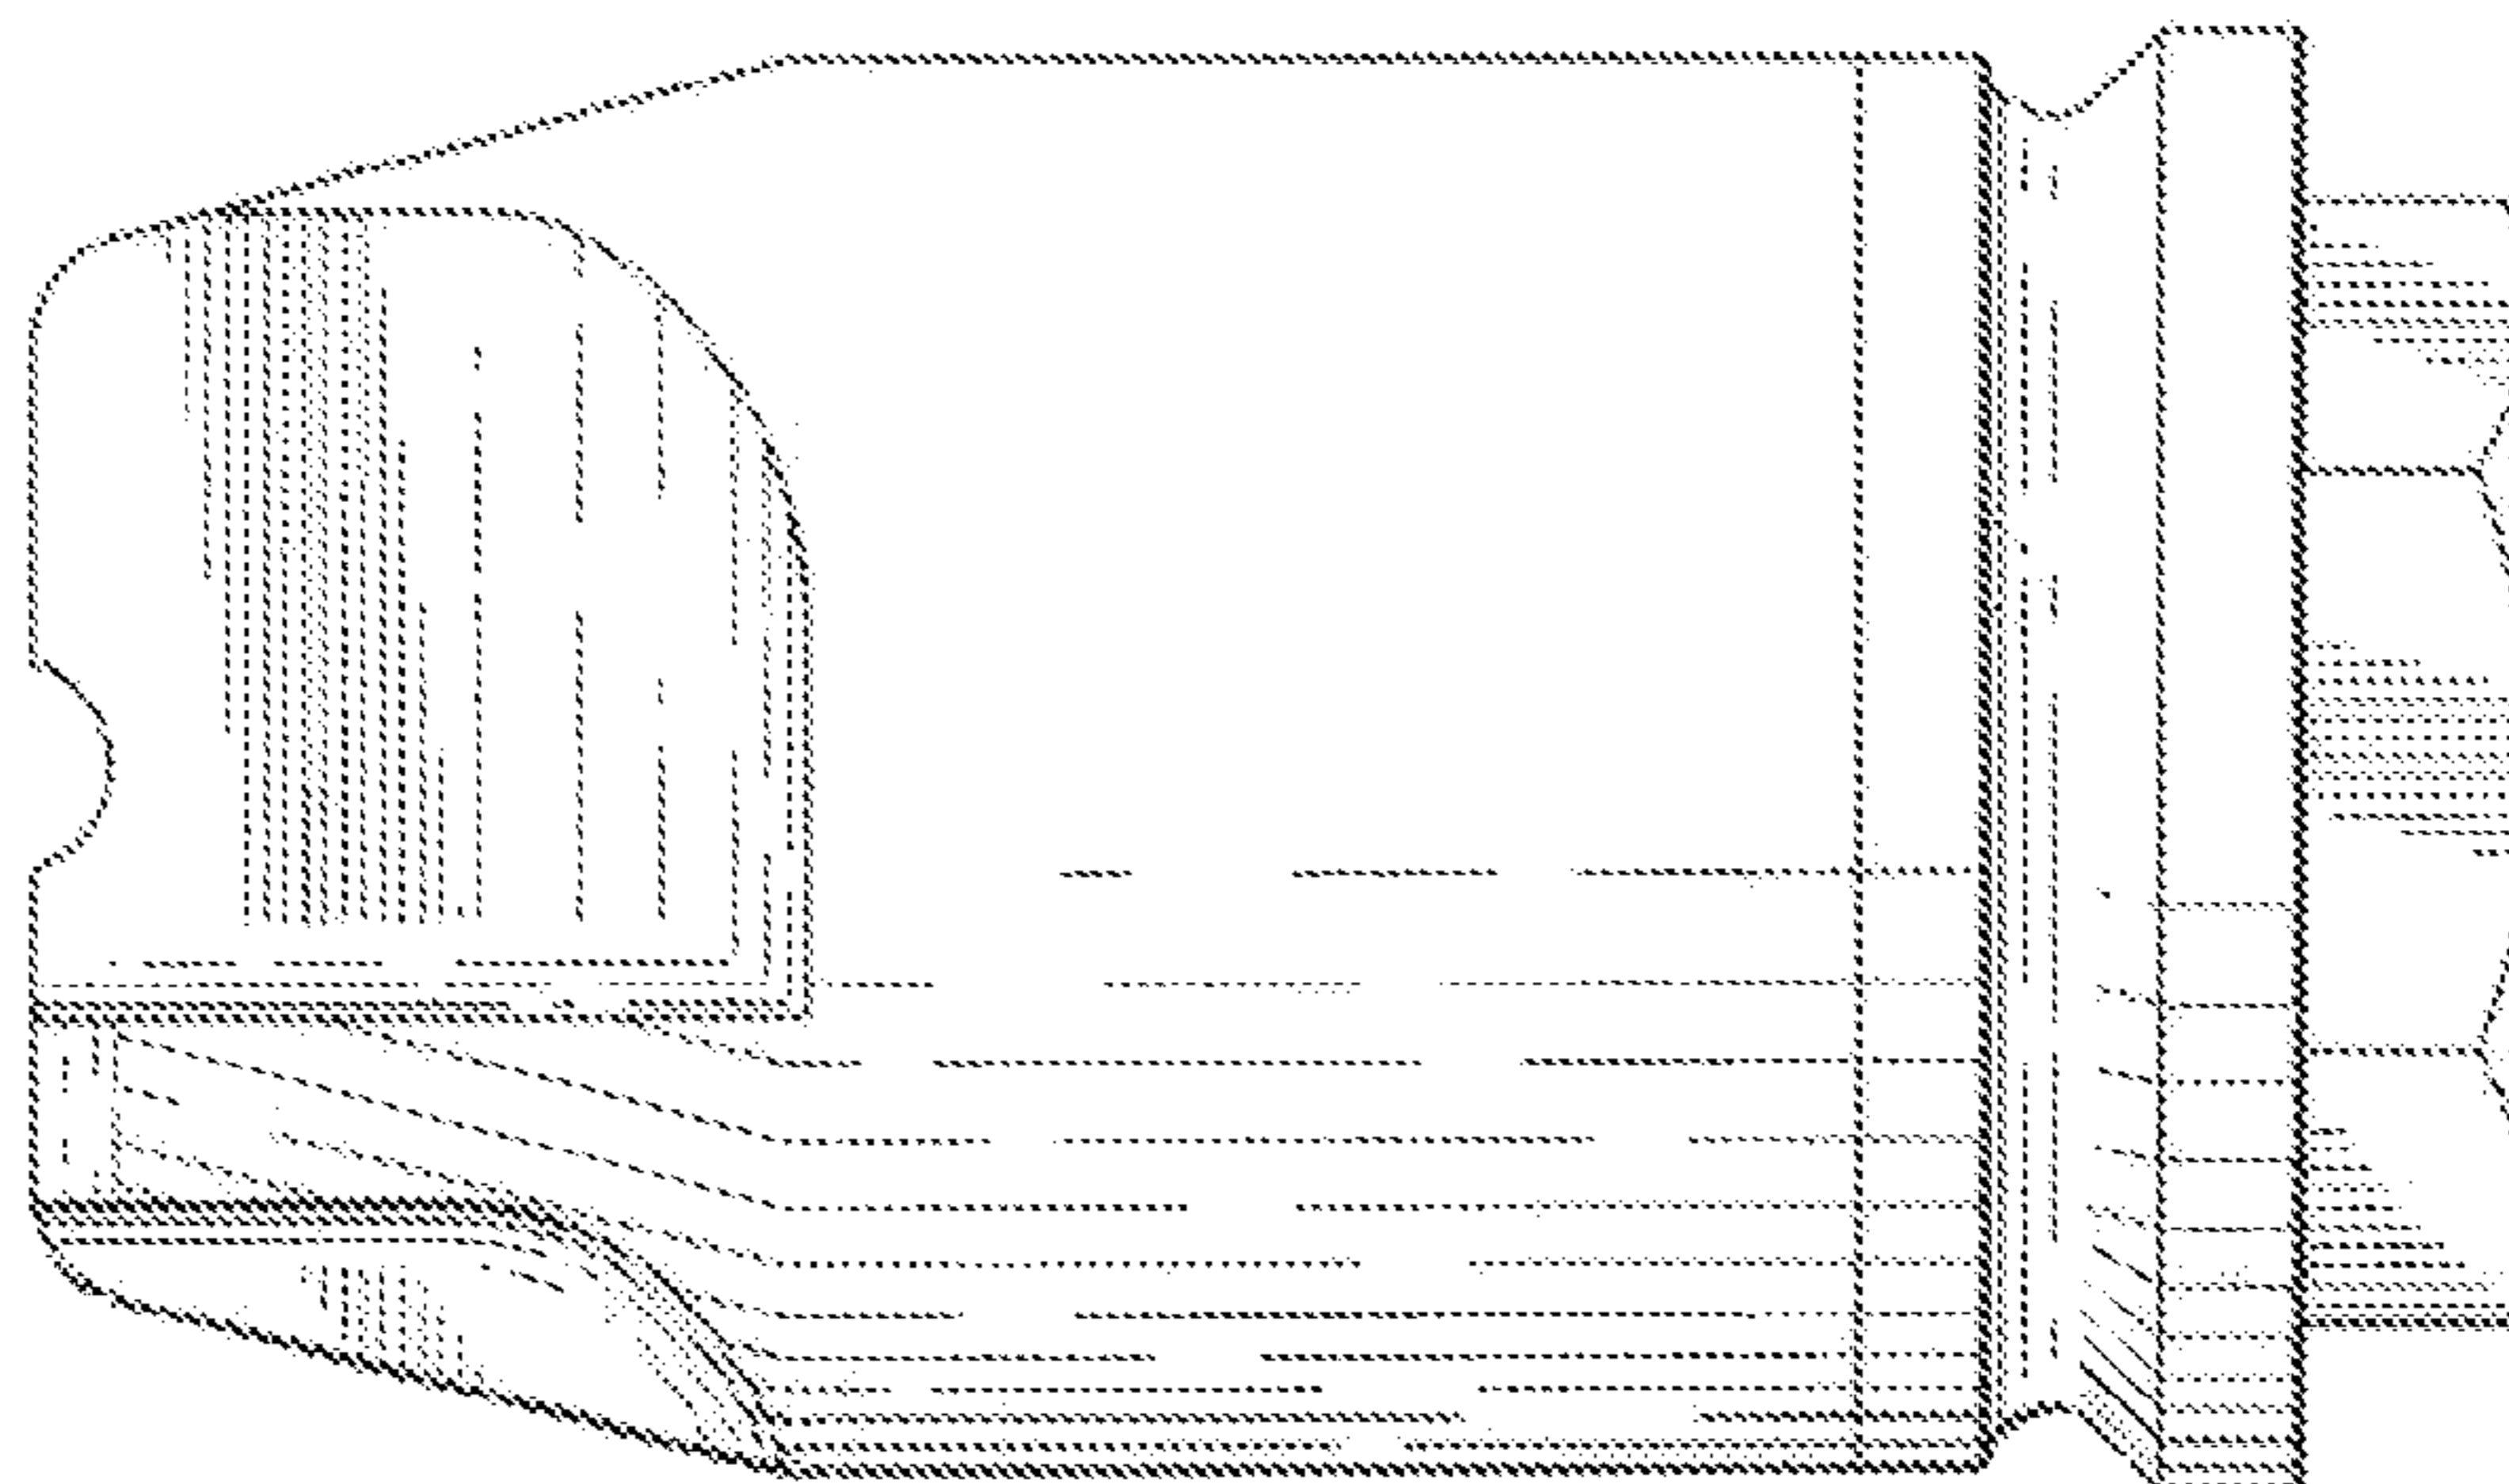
is a front elevational view of a dental implant fixture, showing our new design;
